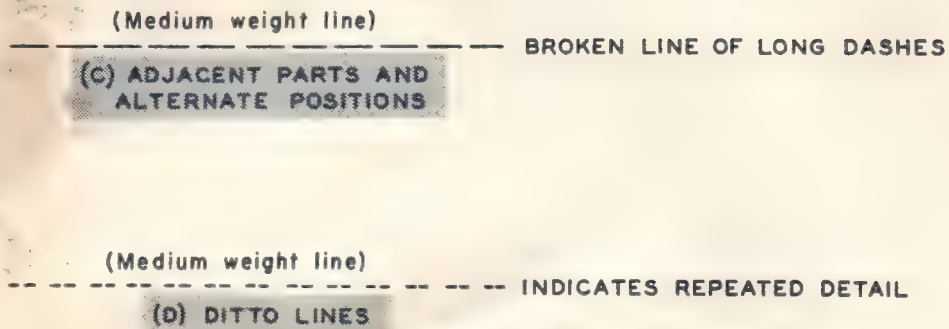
SAMPLES OF OTHER LINES USED ON DRAWINGS
